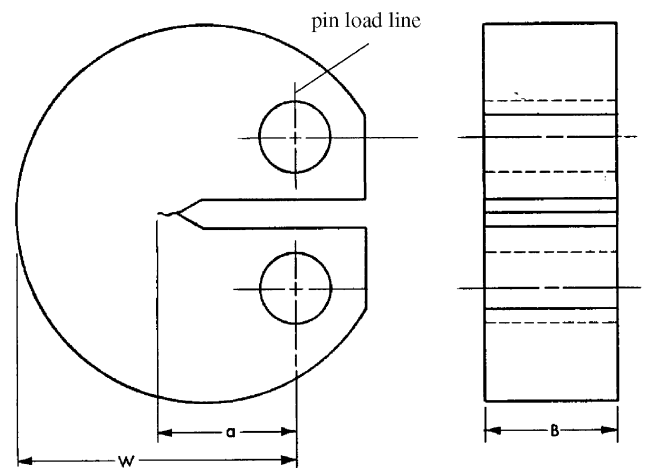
Circular compact tension specimen used in fatigue crack propagation testing. Dimensions were: $W = 40$ mm, $B = 10$ and 20 mm, $a_n = 12$ and 15.7 mm.
